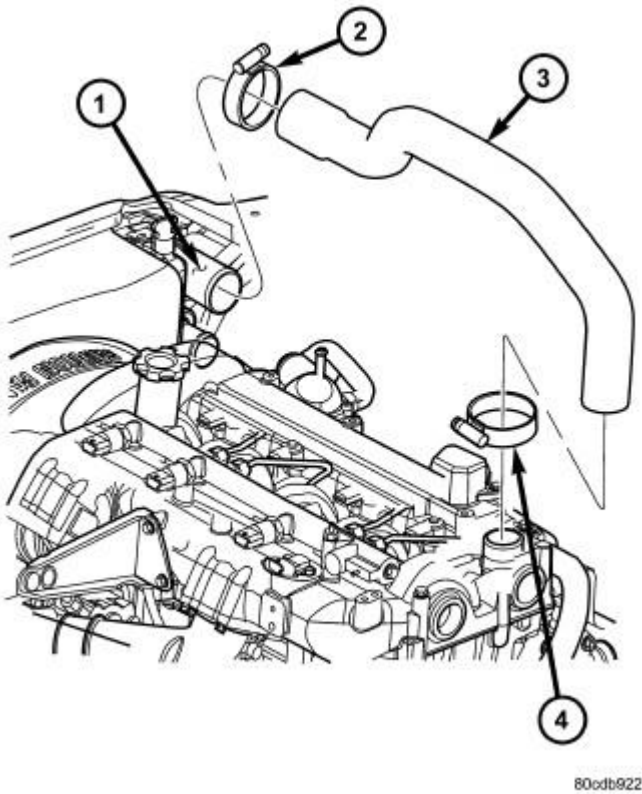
CHARGE AIR COOLER OUTLET HOSE
